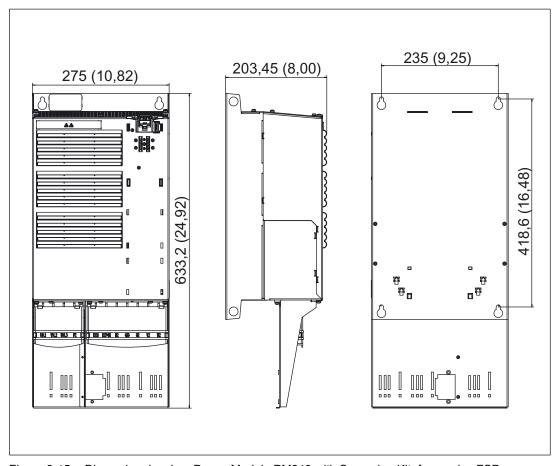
Dimension drawing: Power Module PM340 with Screening Kit, frame size FSD
